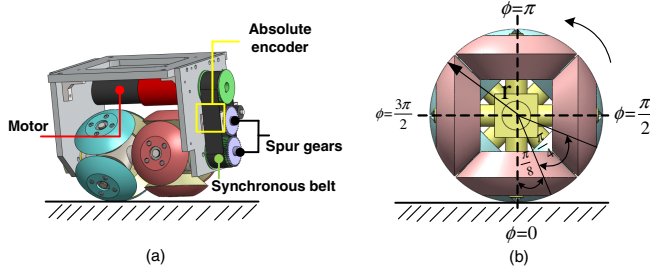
(a) MY wheel-II assembly. (b) End view.
